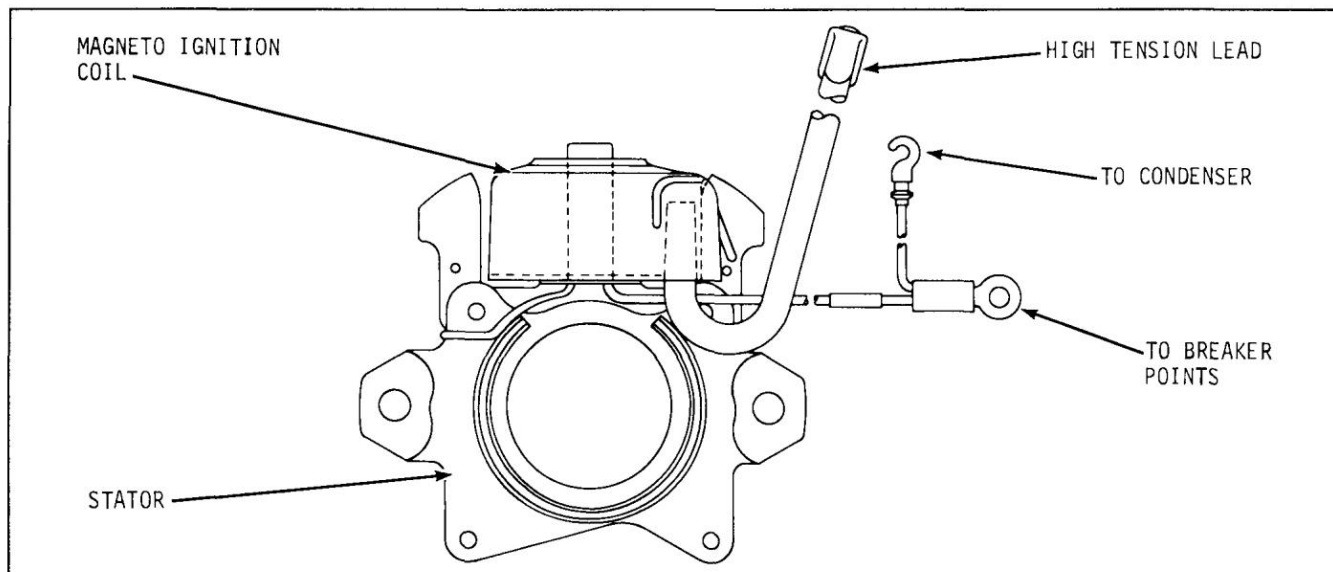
Typical Flywheel Magneto Ignition Coil And Stator.
